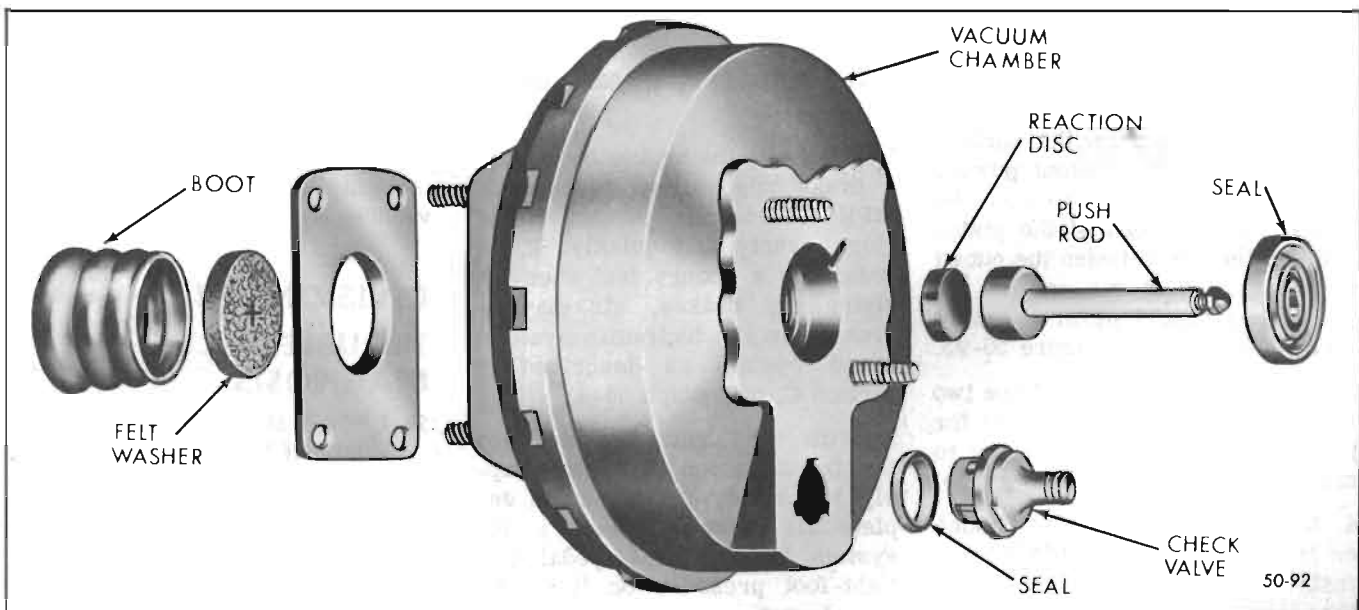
Assembly of Reaction Disc, Push Rod, Seal, Check Valve, Retainer Plate, Washer and Boot
